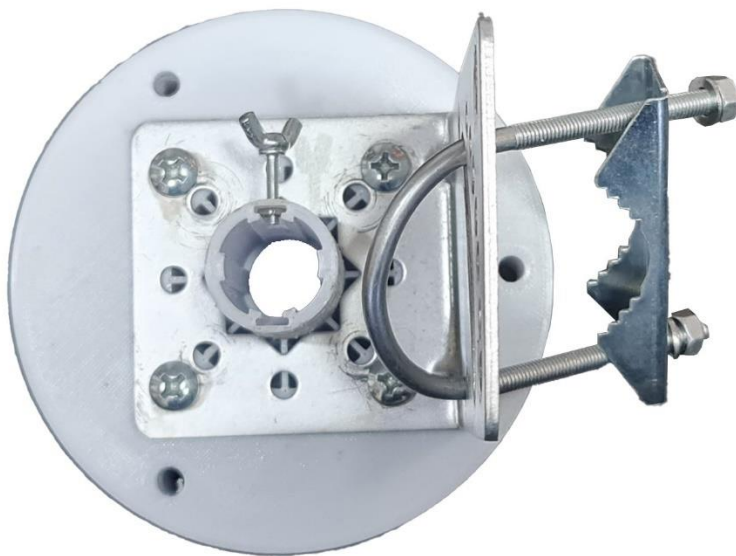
Pipe Guide Mount and U-Bolt Mast Clamp Assembly / Rohrführungshalterung und U-Bolzen-Mastklemmen-Montage / Support de guide de tuyau et assemblage de collier en U pour mât / Uchwyt przewodnika rury i montaż zacisku masztu U-bolt / Montaggio guida tubi e morsetto a U per montaggio su palo / Montura de guía de tubo y ensamble de abrazadera de mástil en U / Buisgeleiderbevestiging en U-bout mastklem montage / Rörguidefäste och U-bultmastklämma montering / Монтаж на тръбна водачка и U-образна скоба за мачта / Csővezető rögzítés és U-csavaros árbocrögzítő szerelés / Suporte de guia de tubo e montagem de braçadeira de mastro em U / Montare suport ghidaj țeavă și clemă de catarg în U / パイプガイドマウントとUボルトマストクランプの組み立て / 管道导向安装座和U型螺栓天线杆夹组装
